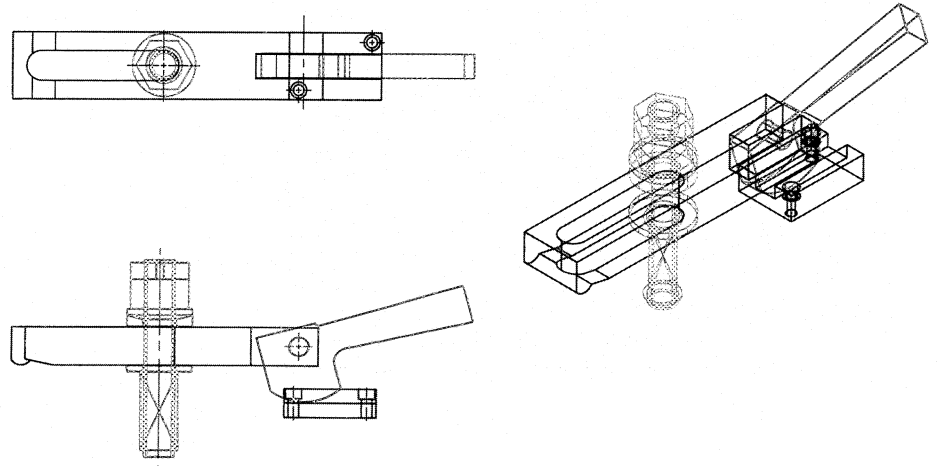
Carr Lane Cam-Clamp Assembly
